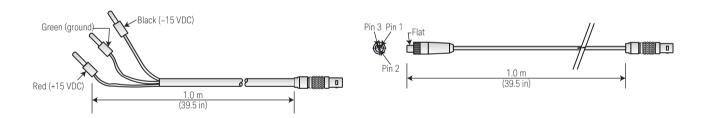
Mechanical dimension for cable option with banana plugs (87405C-101)
